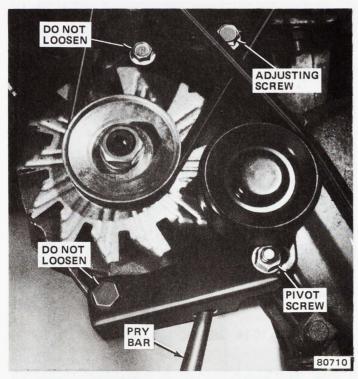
C-16 Alternator Adjustment—Six-Cylinder with Air Conditioning (Except Pacer)
